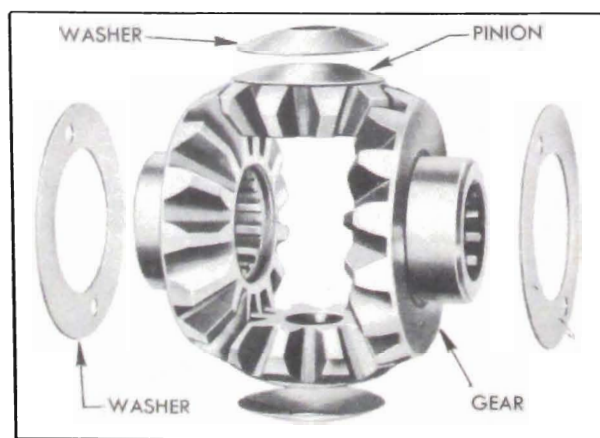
Differential Side Gears, Pinions, and Thrust Washers
